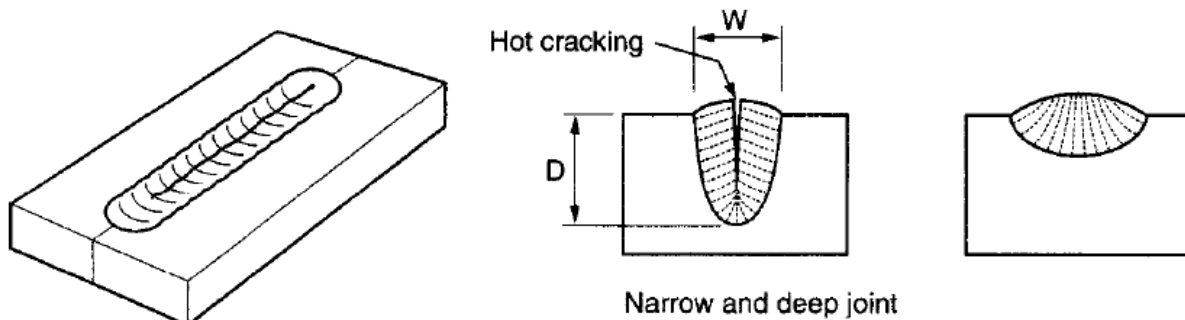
Solidification cracks may appear when the weld is deep and narrow
